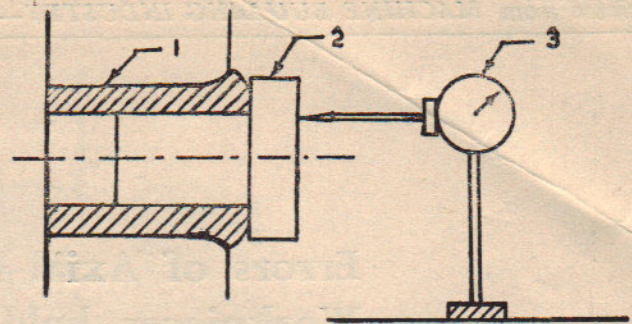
Experimental set-up: (1 : collet 2 : workpiece, 3 : dial gauge).
